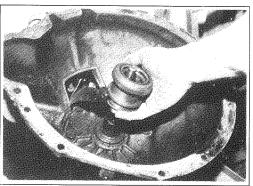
When all's done slide the carrier over the gearbox input shaft and clip the operating arm in place. Refit the gearbox to the engine.
